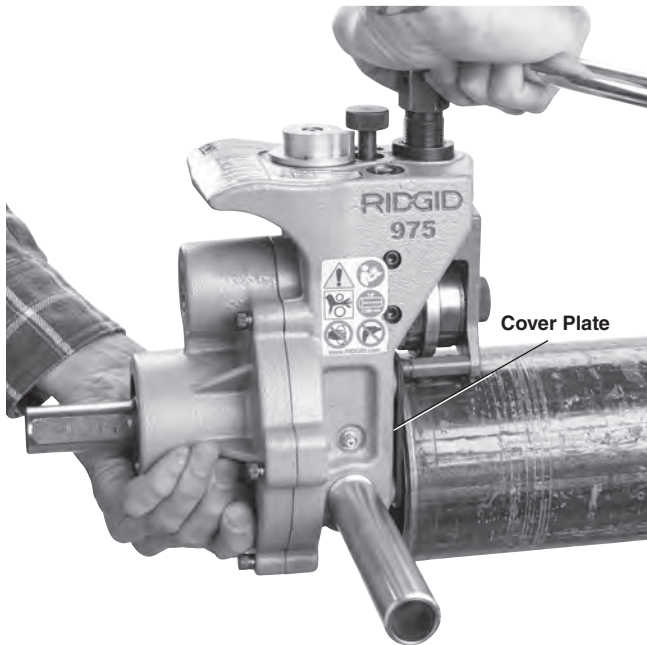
Holding the Roll Groover In Place While Tightening the Feedscrew
